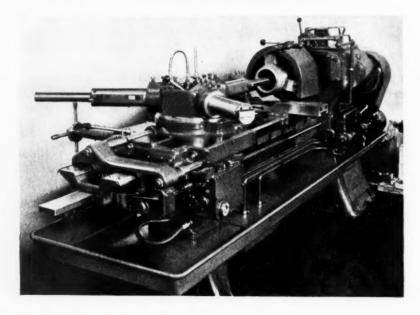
The Next Operation on the Barrels Consists of Rough-boring, Facing the Rough End, and Chamfering Both Ends on a Jones & Lamson Universal Turret Lathe Equipped as Shown
